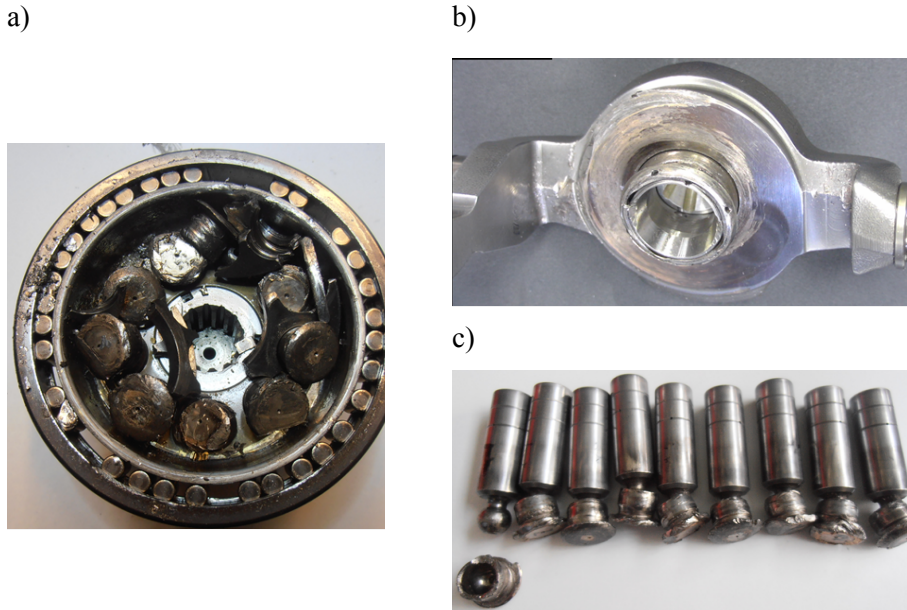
View of the damaged elements of the variable displacement hydraulic pump: a) cylinder block on the side of the swivel thrust plate with visible fragments of the separator, b) swivel thrust plate numerous signs of damage, c) pump pistons with feet
